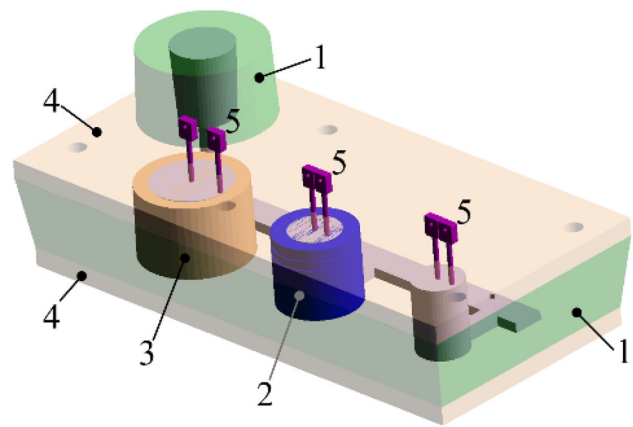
The experimental layout: (1) sand mold, (2) steel cylinder (chill), (3) cylindrical insulation material, (4) insulation plates, (5) thermocouples. Figure adapted from.¹²
